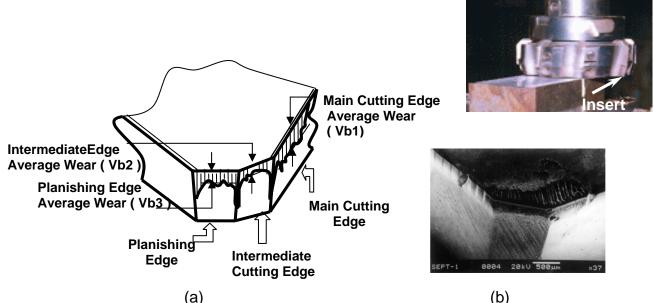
Schematic (a) and actual view (b) of wear pattern of face milling insert
